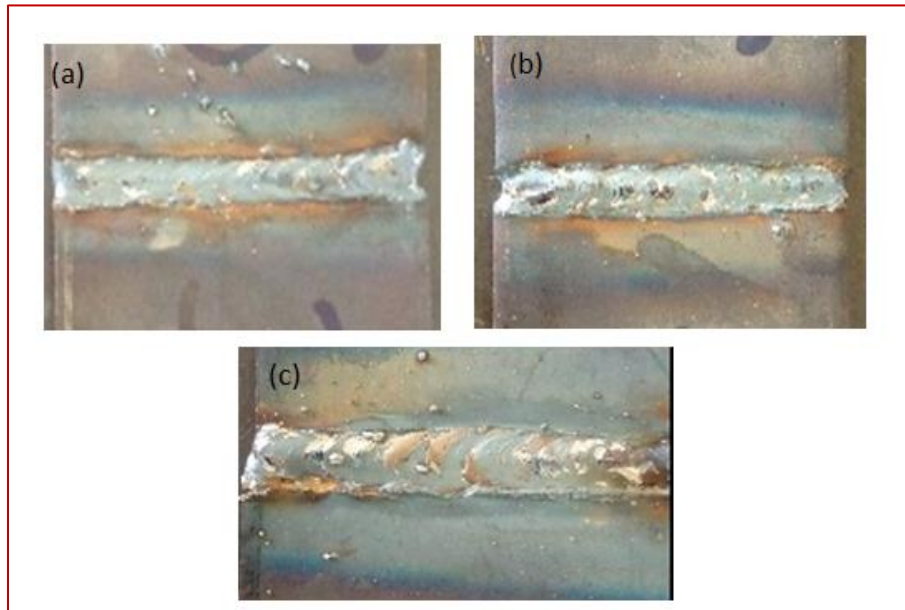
7. Welding bead diameter (a) 7.6mm , (b) 7.1
